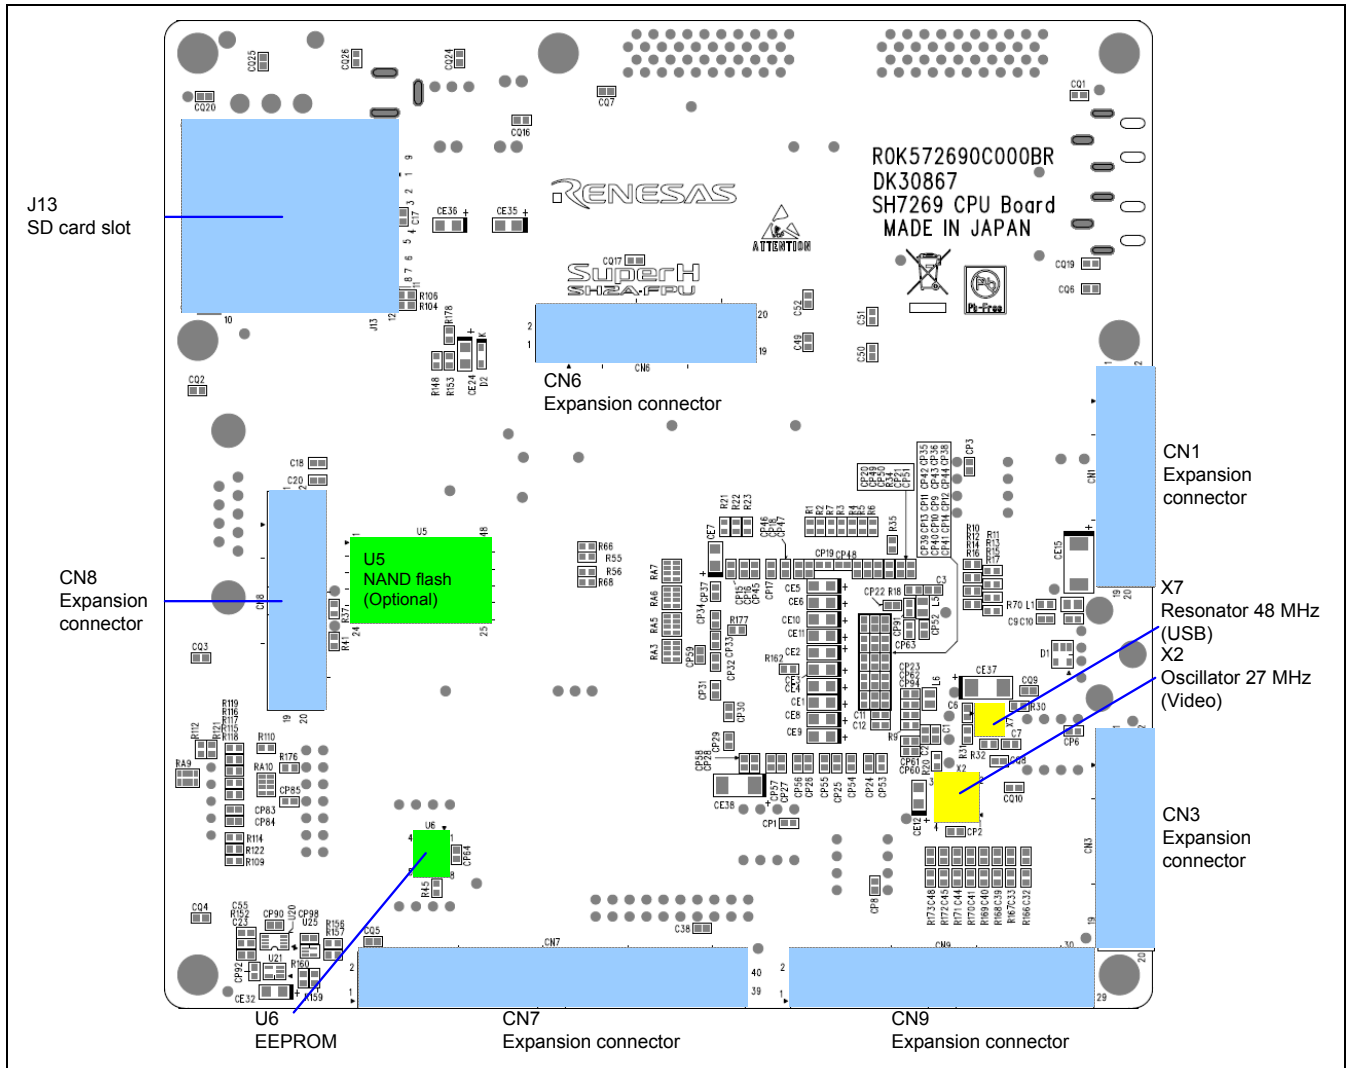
SH7269 CPU Board Layout and Component Placement (Top View of the Solder Side)
